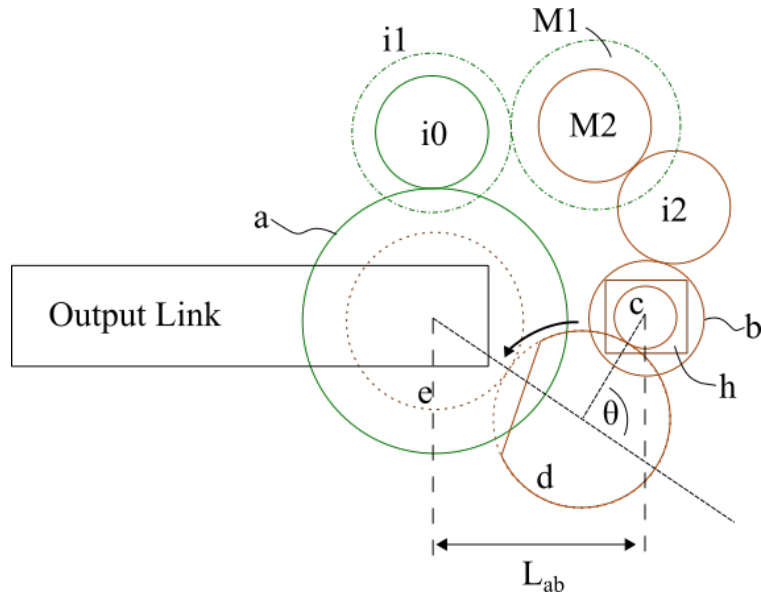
Prearrangement of gears in the joint prototype design (lateral view)
